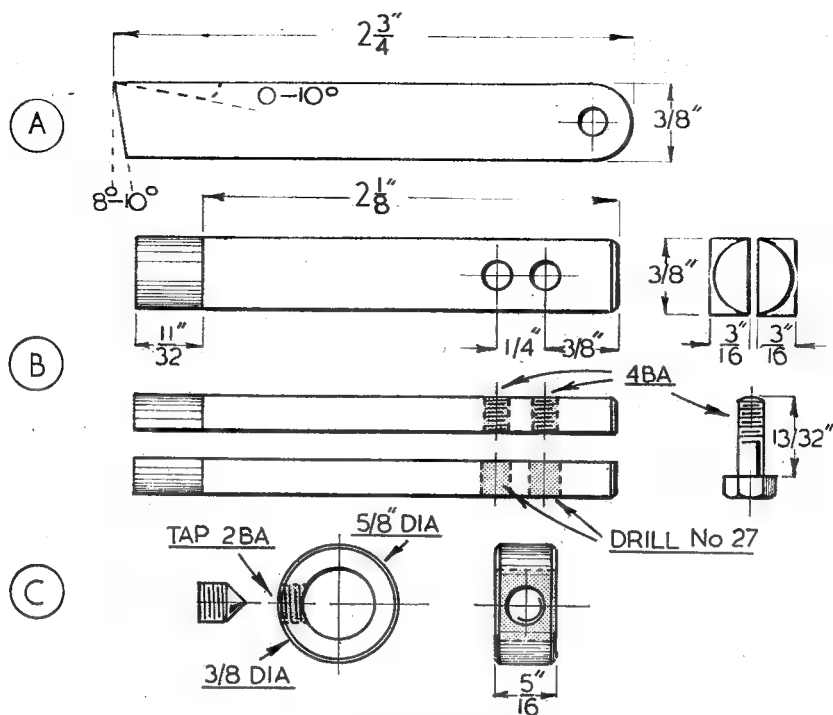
"A"—the blade; "B"—the holder and clamp-screw; "C"—the clamp collar
